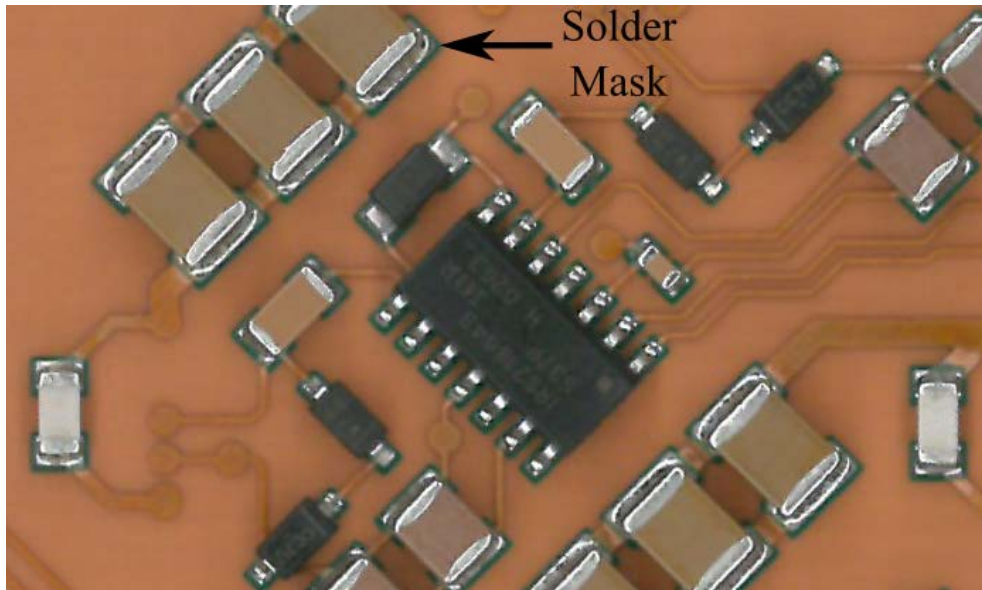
View of SMD components mounted on the layer 3. A fine line of solder mask (green) is deposited around each pad to prevent the solder attach from flowing along the copper tracks.
